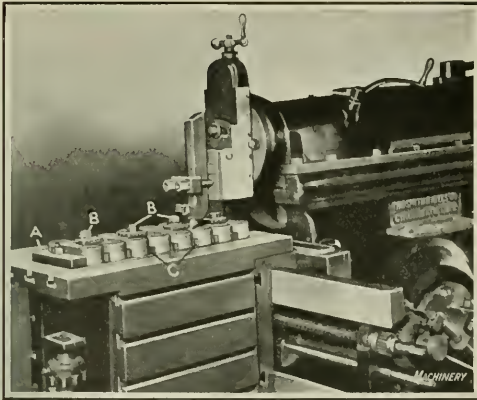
Crank Shaper equipped for planing the Bosses on a String of Eight Shaper Pendulum Links
